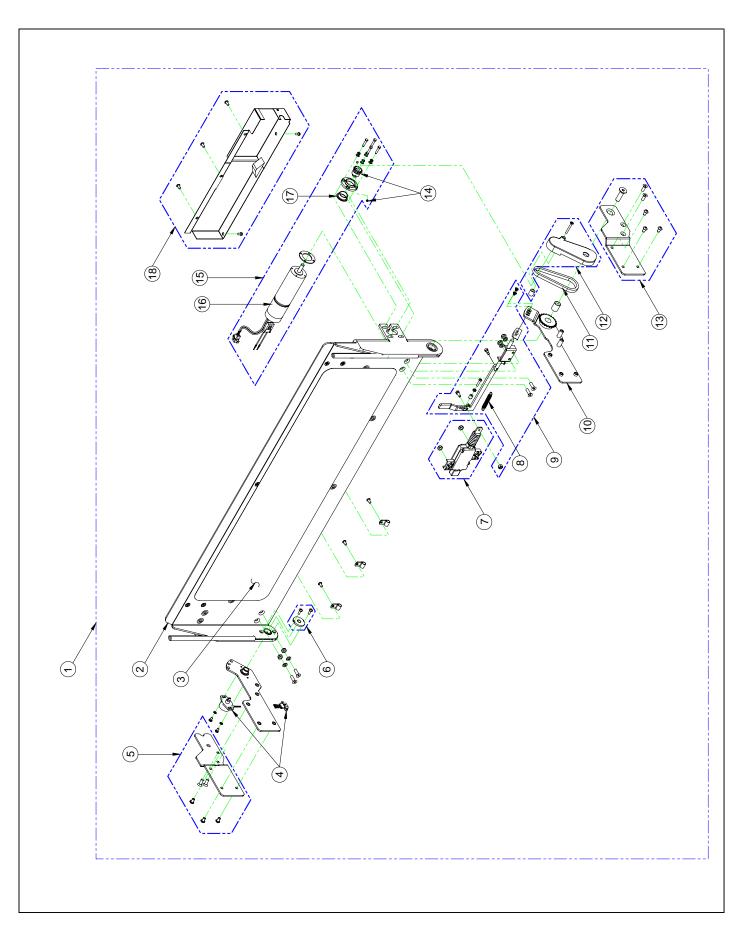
PLATFORM BRIDGEPLATE ASSEMBLY
